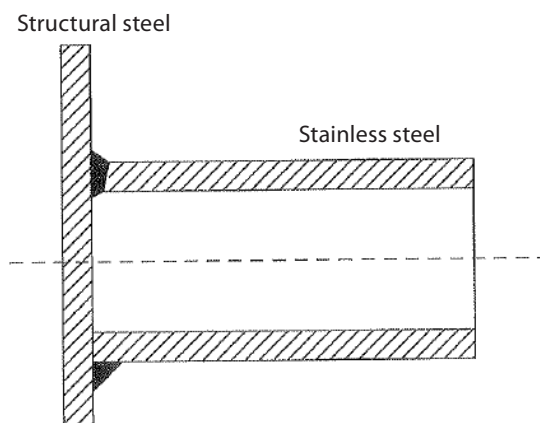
Detail susceptible to galvanic corrosion on the weld root side. The weld joint above is recommended.
